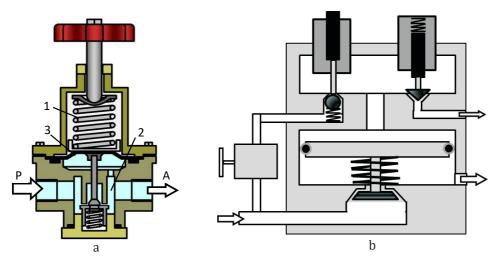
Pressure control units: a – adjuster; b – modulator.
